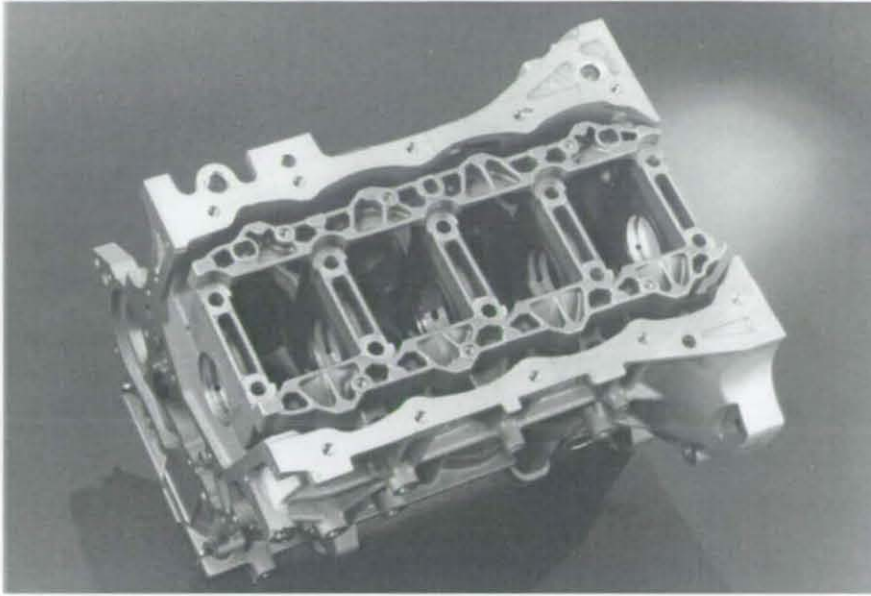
Aluminium Engine Block and Bearing Beam
